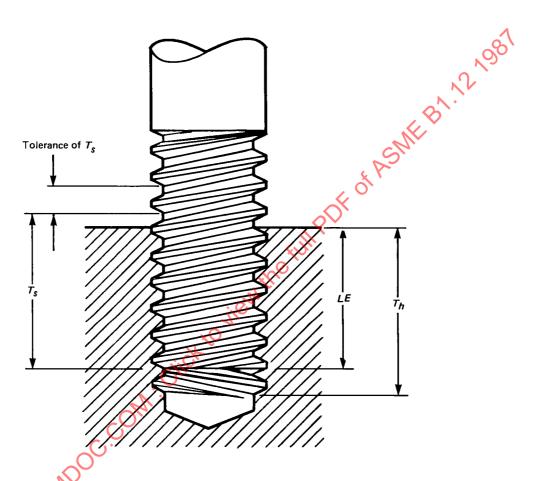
ILLUSTRATION OF LE, T_s , TOLERANCE OF T_s , and T_h REQUIRED FOR ASSEMBLED THREADS (To Prevent Bottoming of Stud in Hole, See Table 8)
